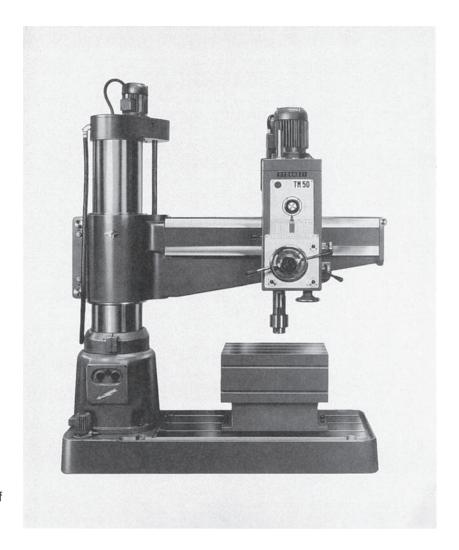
Radial drill press. (Courtesy of Willis Machinery and Tools.)
